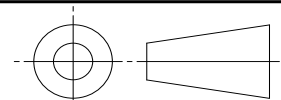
FITTING ASSEMBLY, ADAPTER
